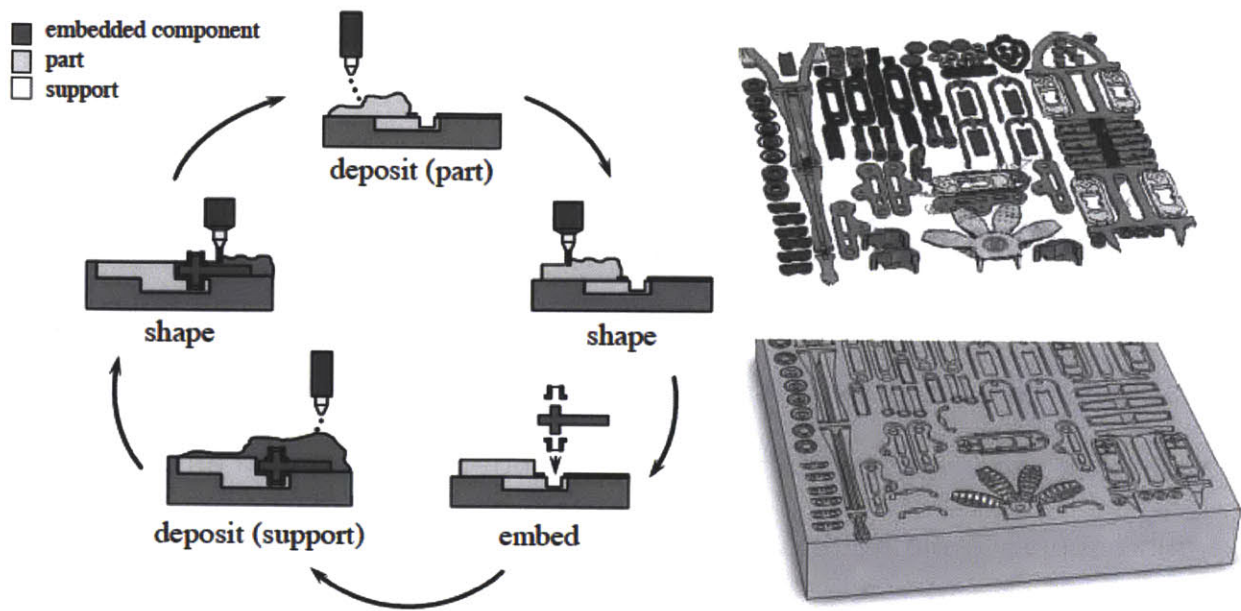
Shape deposition manufacturing is a process that involves the alternate layering and shaping of structural and filler material. Discrete components can be added after any shaping step. Multiple components can be fabricated on the same substrate. [2]
